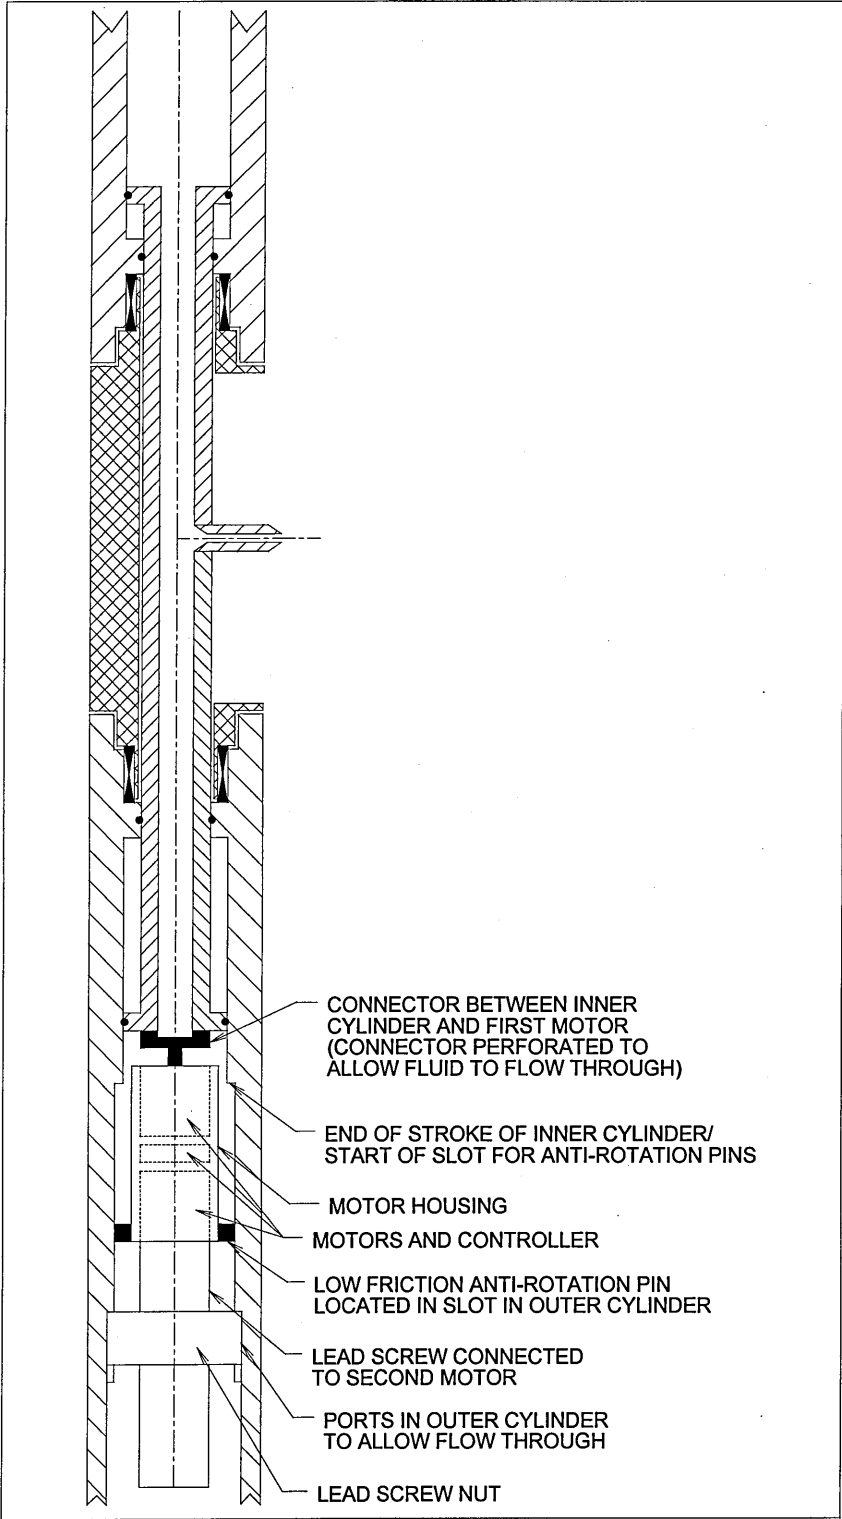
SCHEMATIC OF MANIPULATOR INCORPORATING MOTORS AND PRESSURE BALANCED TELESCOPE
